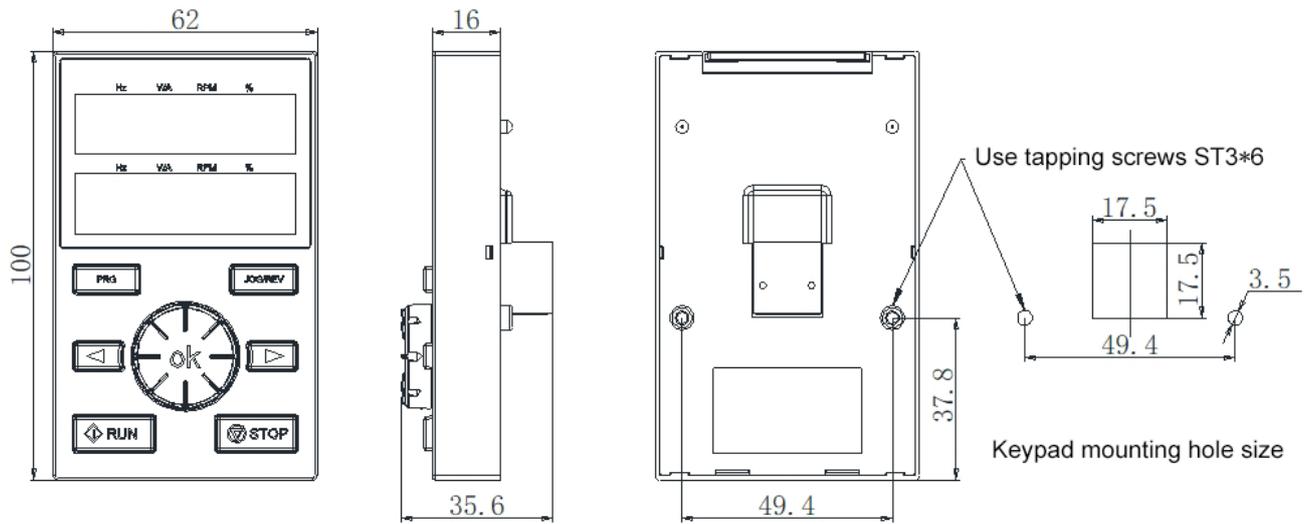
Boundary Dimensions and Bore Dimensions of External Dual-line Keyboard
